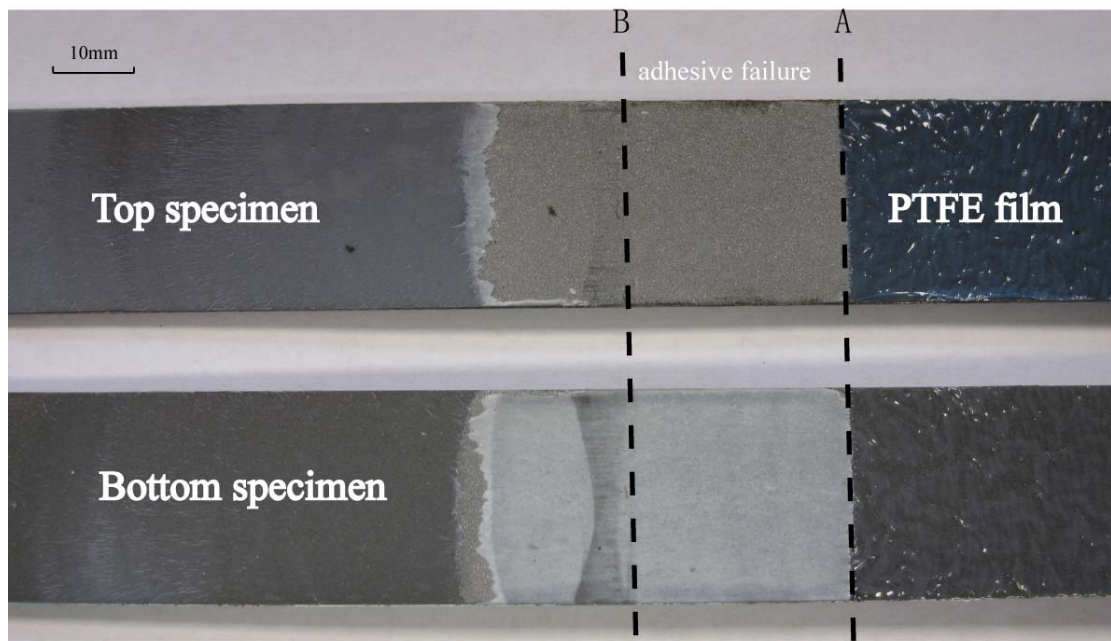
Typical fracture surface of MMB test using 0.2mm adhesive
